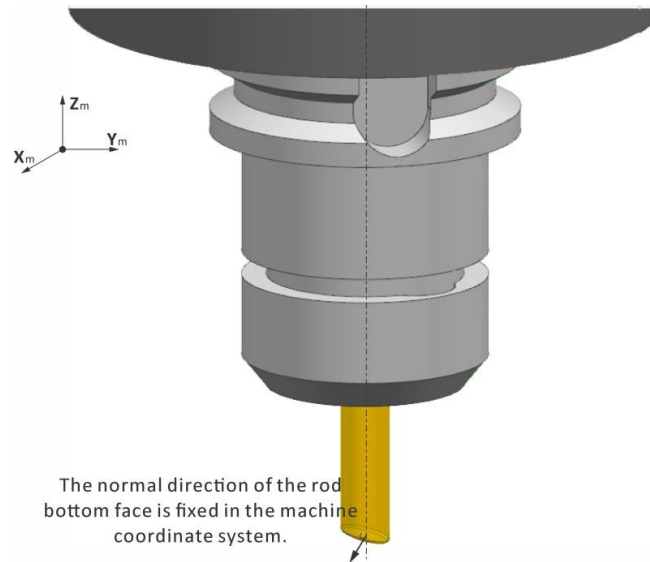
The geometry model of the end measuring rod mounted in the spindle in the virtual gauging configuration.
